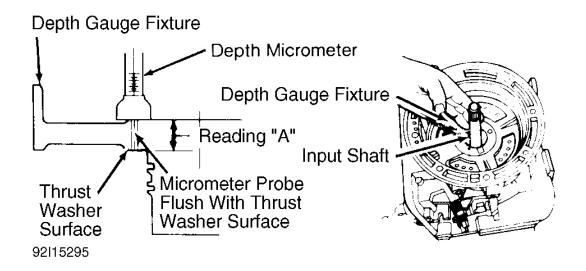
Measuring Rear End Play Courtesy of FORD MOTOR CO.
